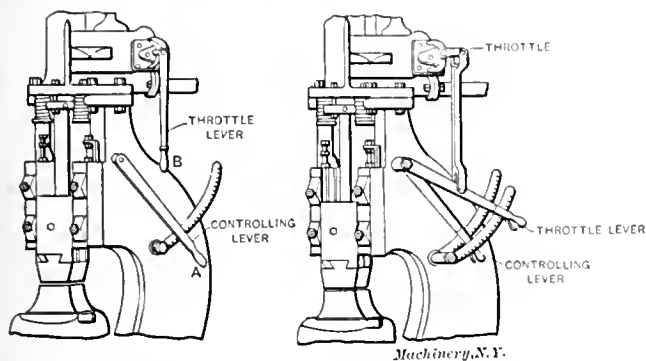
Single Frame Steam Hammer, showing Common Arrangement of Levers
